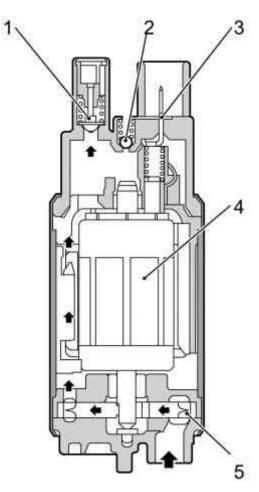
The design of the roller pump: 1 - check valve, 2 - safety valve, and 3 - connecting to the mains, 4 - electric motor 5 - impeller
